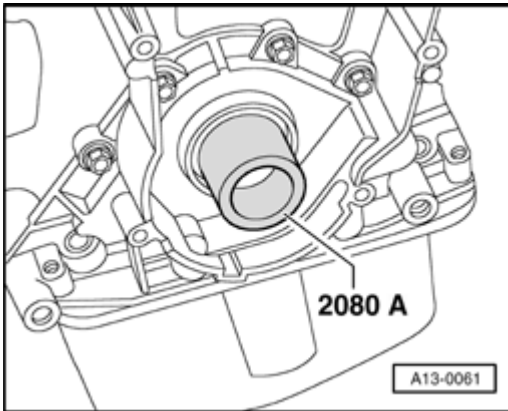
Identifying Guide Sleeve 2080 A Mount Onto Crankshaft Journal
